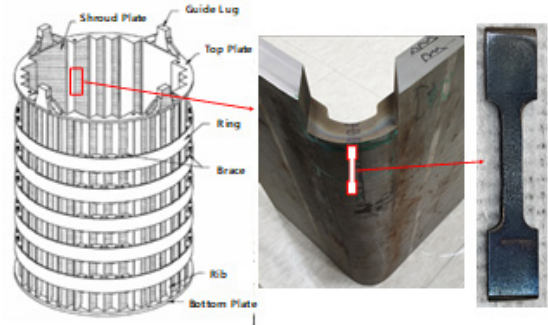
Drawing of reactor vessel internal(CE Type), photograph of bending part and tensile specimen for SCC initiation test
